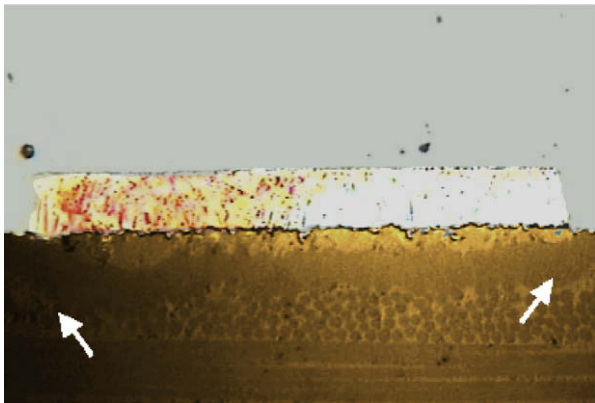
Crack in board resin underneath pad (thick dark area), no edge bond.
